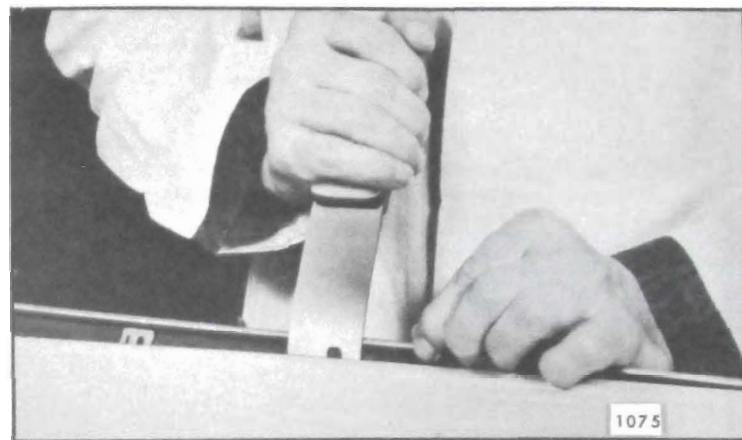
Glass Run Channel Inner-Outer Strip Removal - "A-X & Z" Styles
